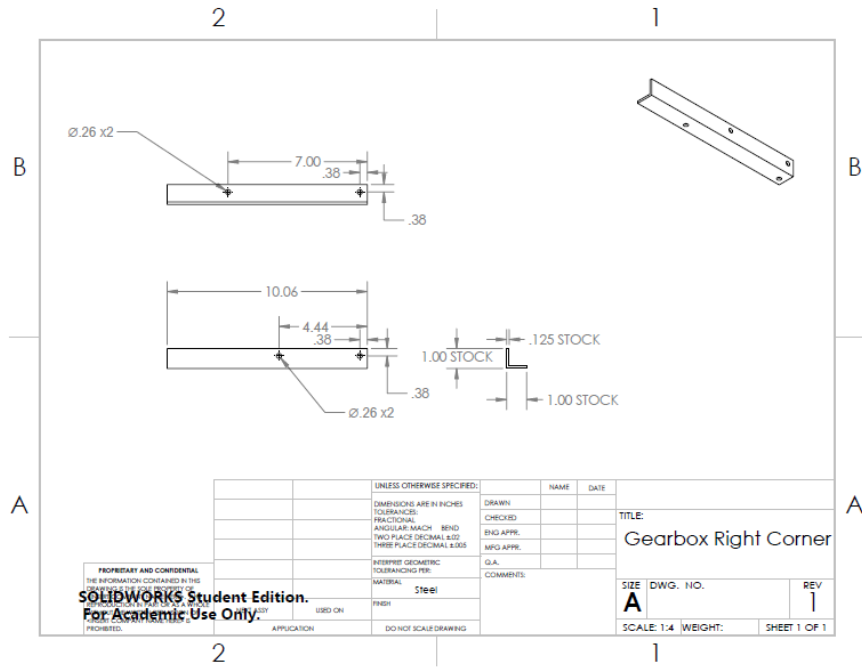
Gearbox Right Corner Drawing. Revised: See Appendix E.3
